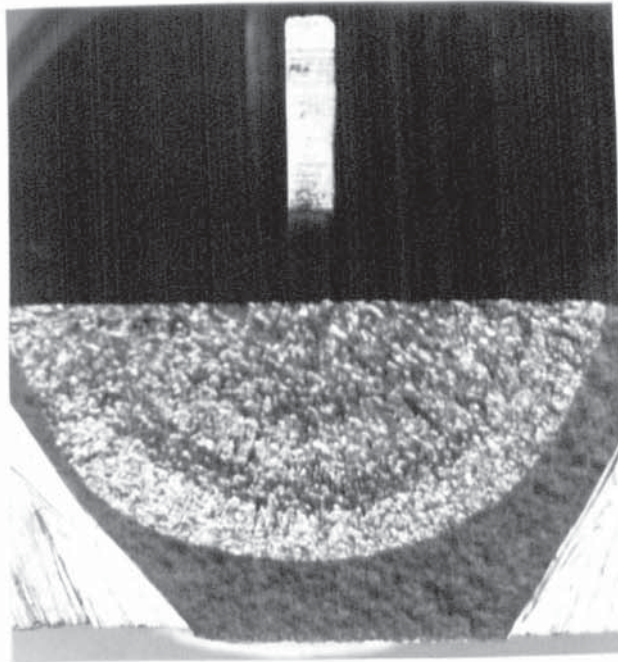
Thumbnail Fatigue Fracture with Crack Front Markings produced by Load Range Changes in Experimental P.D. Calibrations. ($R = 0.1$ and 0.5).
